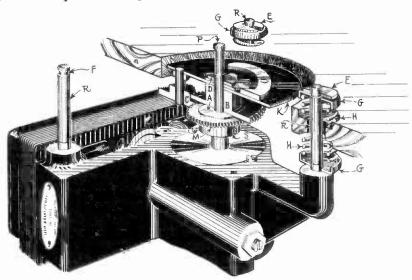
CUT-AWAY VIEW SHOWING CONSTRUCTION OF SPERD-CHANGE MECHANISM ASSEMBLED WITH THE MOTOR
